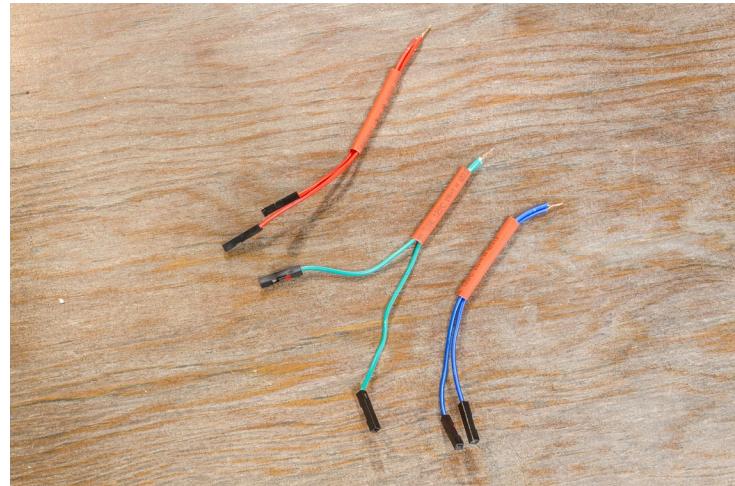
Jumper wires prepped for soldering (double-height sensor configuration)
